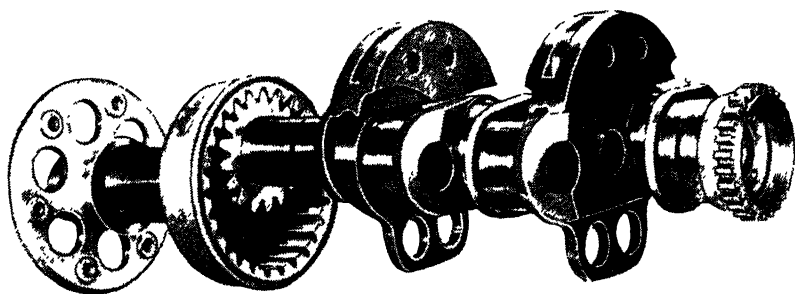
Engine to Propeller Reduction by Annular Gearing.
